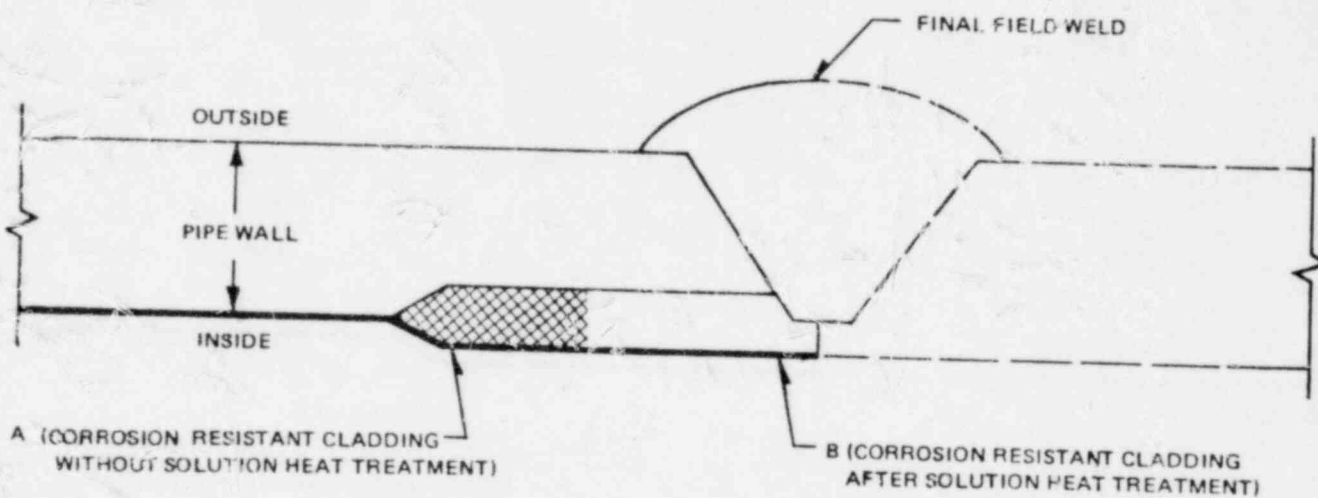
Corrosion Resistant Cladding Process for Type-304 Stainless Steel Welded Piping
